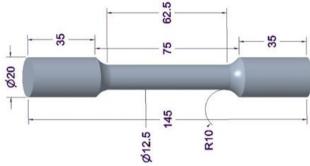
Dimensions of the cylindrical tensile test specimen (Unit: mm)
